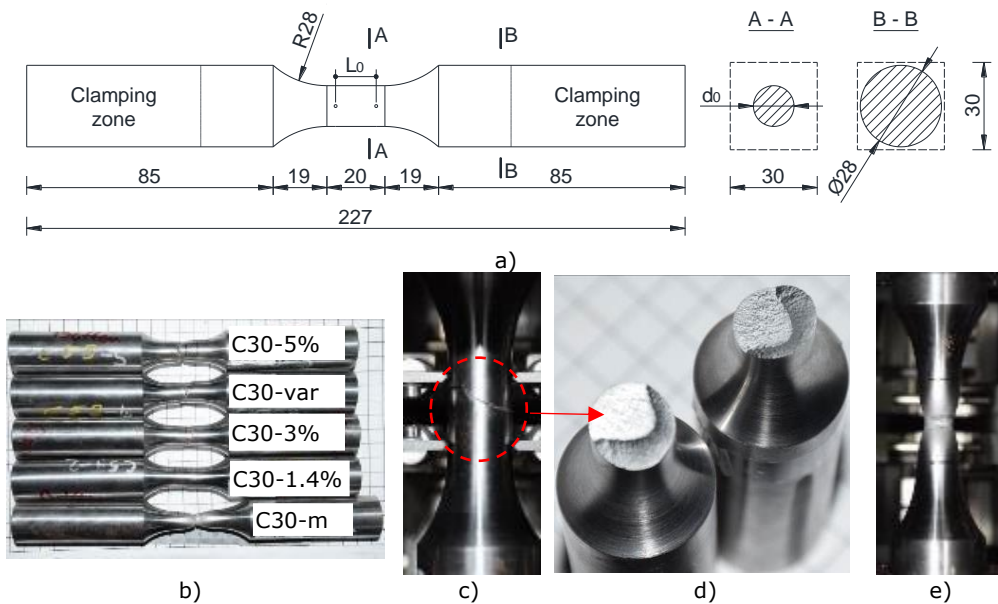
Cyclic tests on steel material: a) typical geometry, b) tested coupon specimens, c) typical failure mode, d) fracture surface, e) failure mode of *C30-m* specimen
